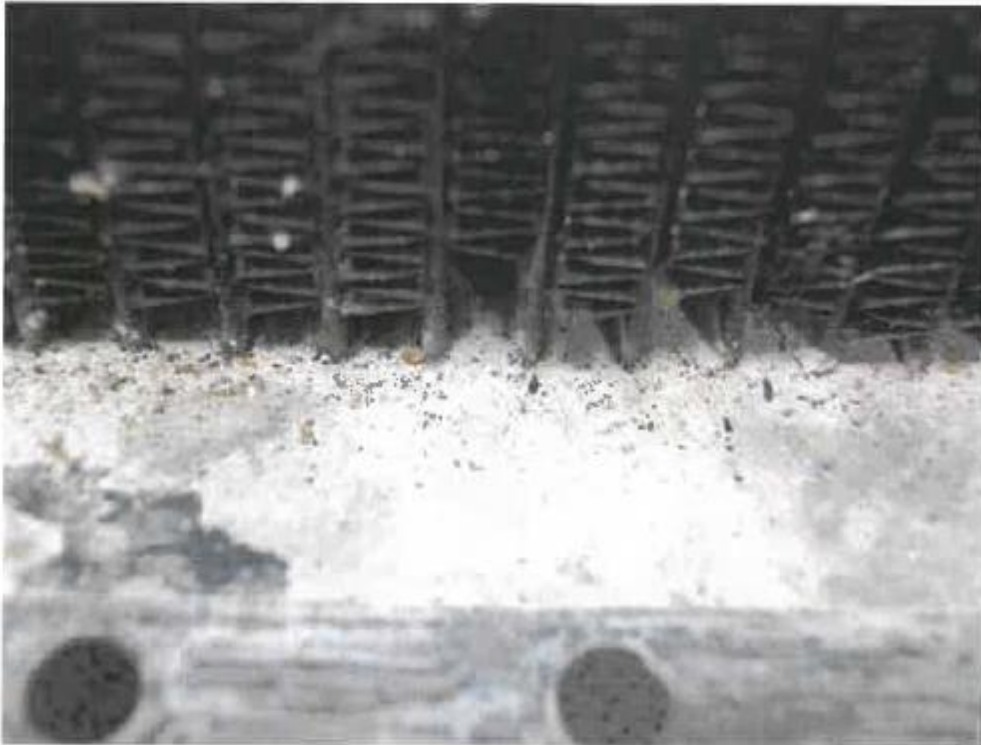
Bottom endplate, showing vertical tubes, "zig-zag tape" between tubes and pale brown/cream deposit on endplate. This is the surface normally exposed to air, not the "coolant" side of the heat exchanger.
